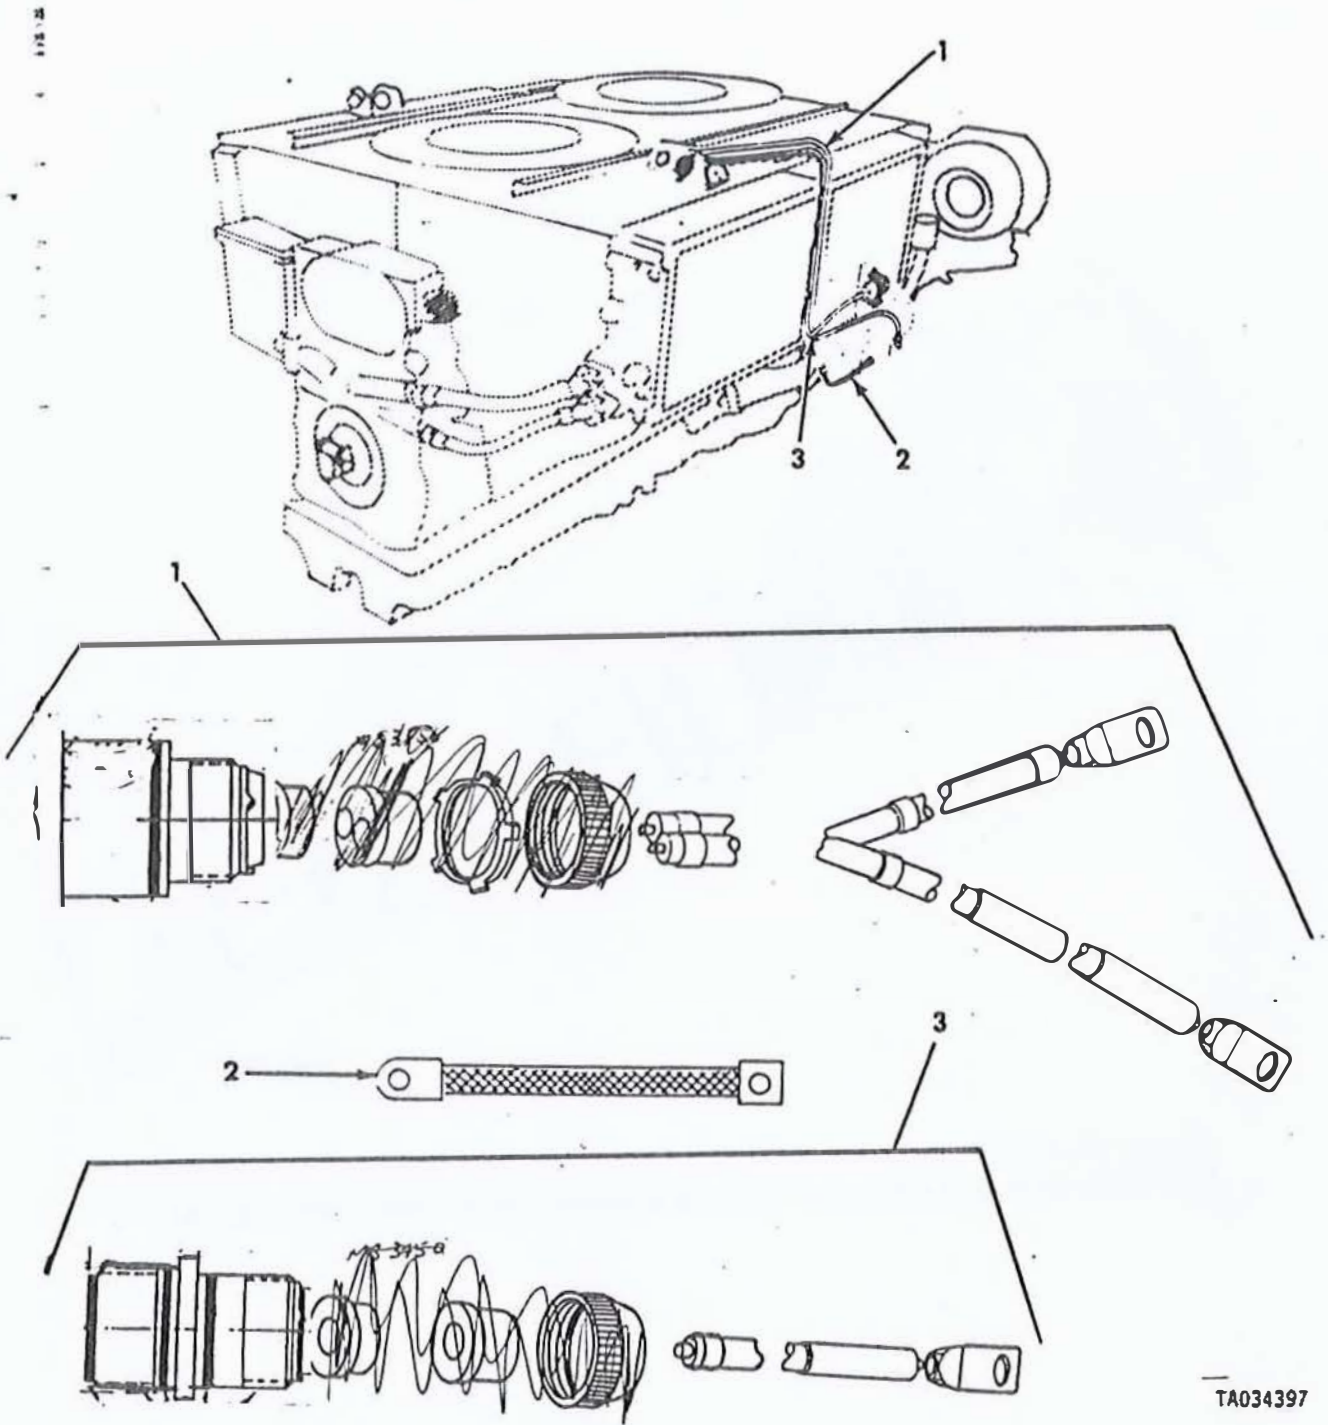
Generator cables, blower motor harness, and associated parts (Models AVDS-1790-2D and AVDS-1790-2DA).
